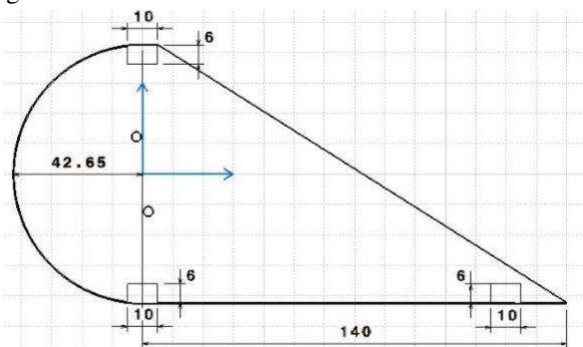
Final shape of the wind turbine blade (dimensions in mm).
